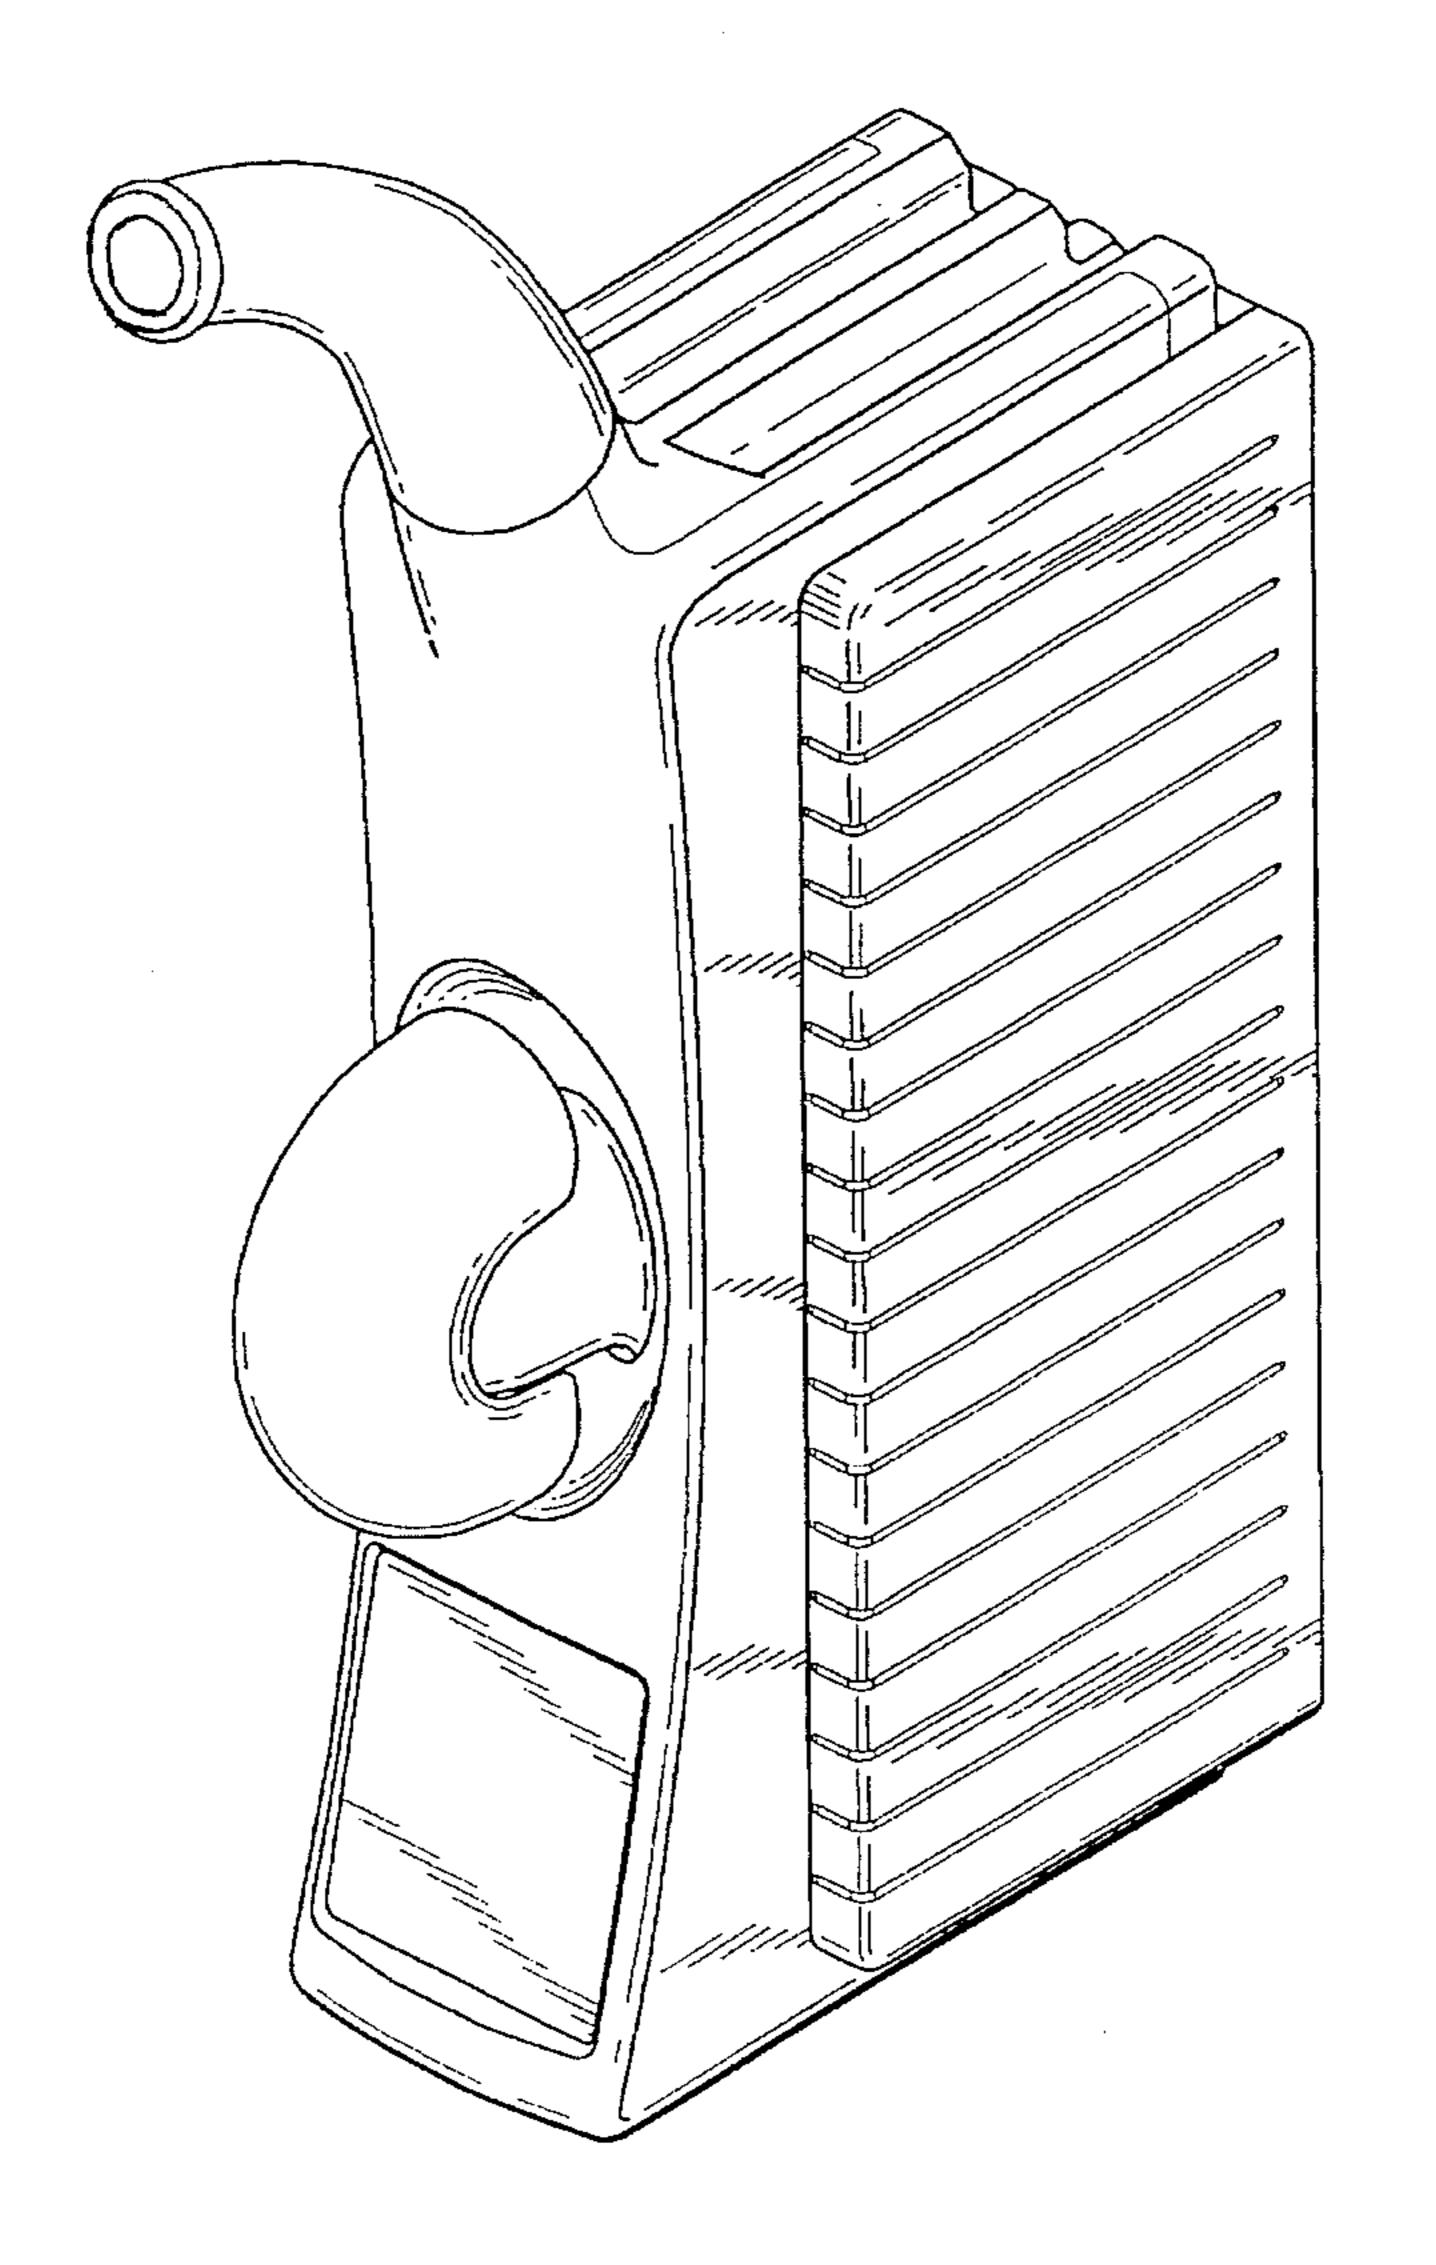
is the right view of the transducer connector case design of the invention; and,
